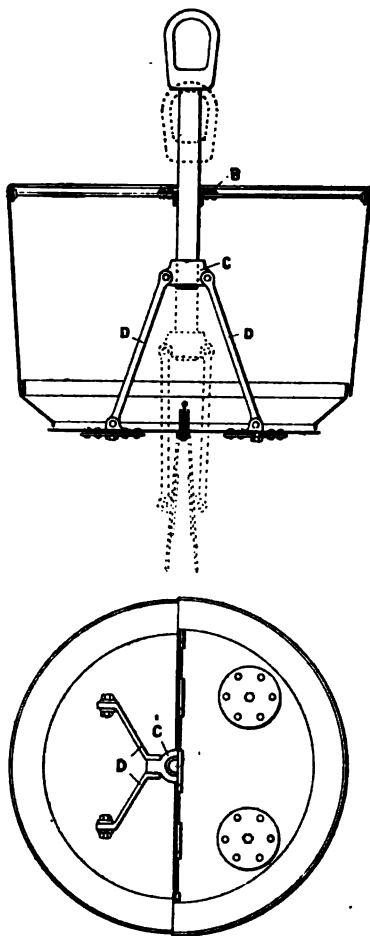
Mechanical Bucket formerly in use at the Millwall Docks.
